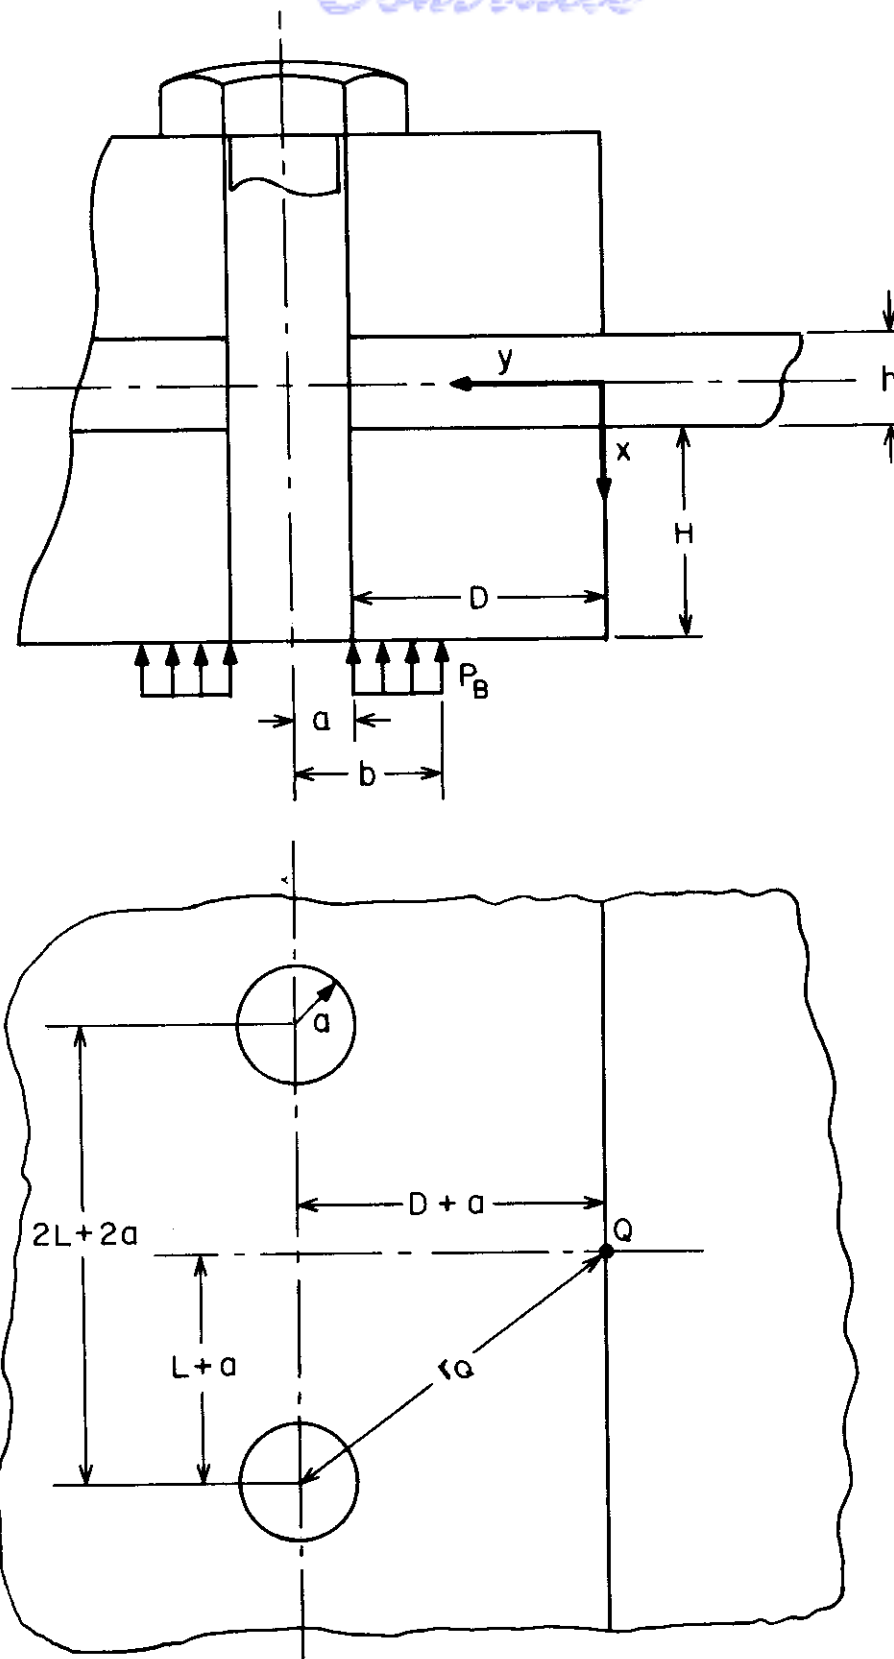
BOLTED EDGE-CLAMP GEOMETRY
